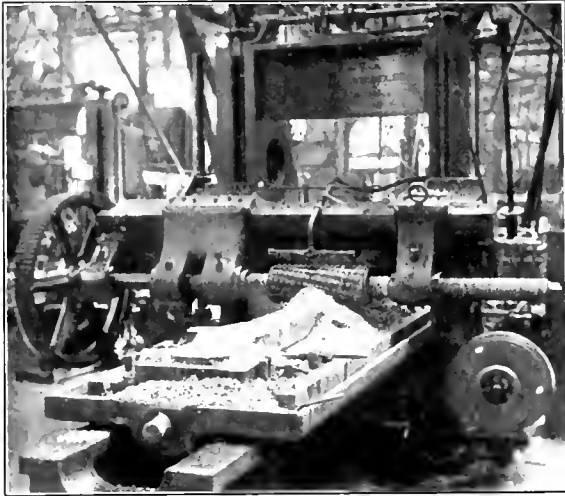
Finishing the Sides of a Rod on a Slab Milling Machine
